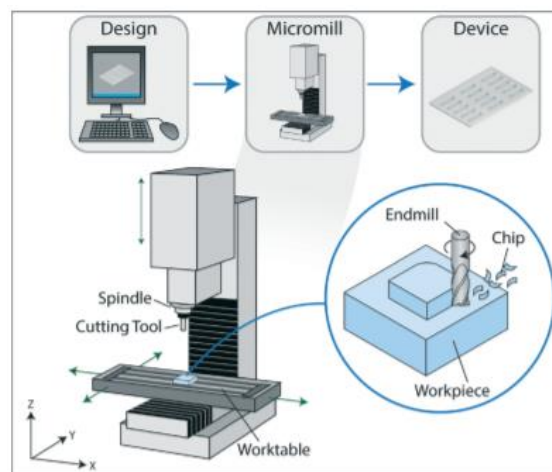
A schematic of micro-milling technique; adapted from³⁵.
